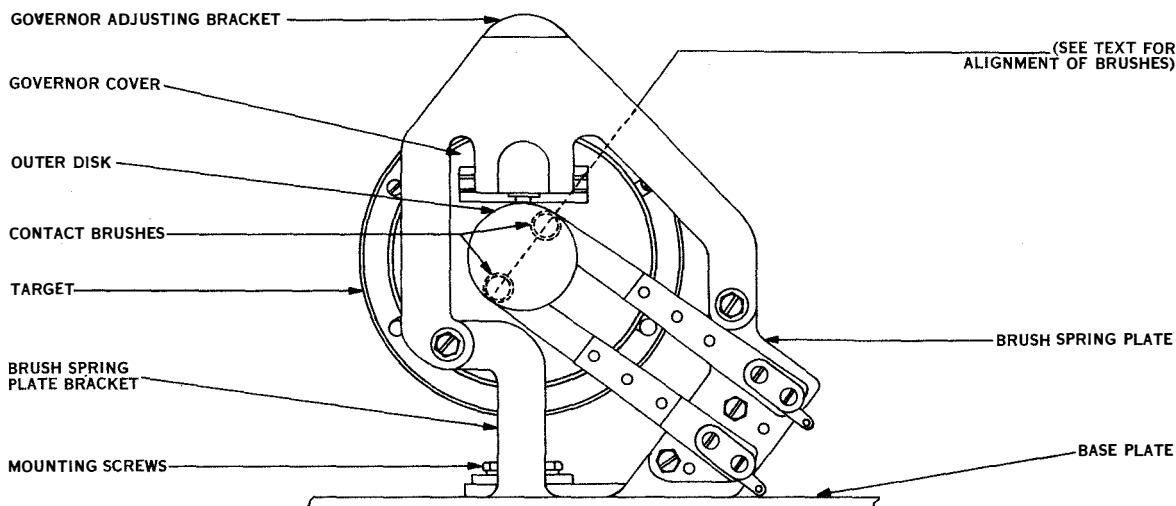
Governor Adjusting and Brush Spring Plate Brackets
